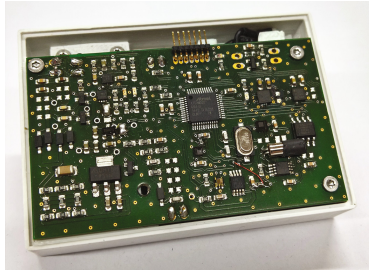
The *PackSens* sensor platform. PCB dimensions: 68 mm \times 41 mm. Outer case dimensions: 71 mm \times 50 mm \times 19 mm. Weight of the whole platform: 52 g.
